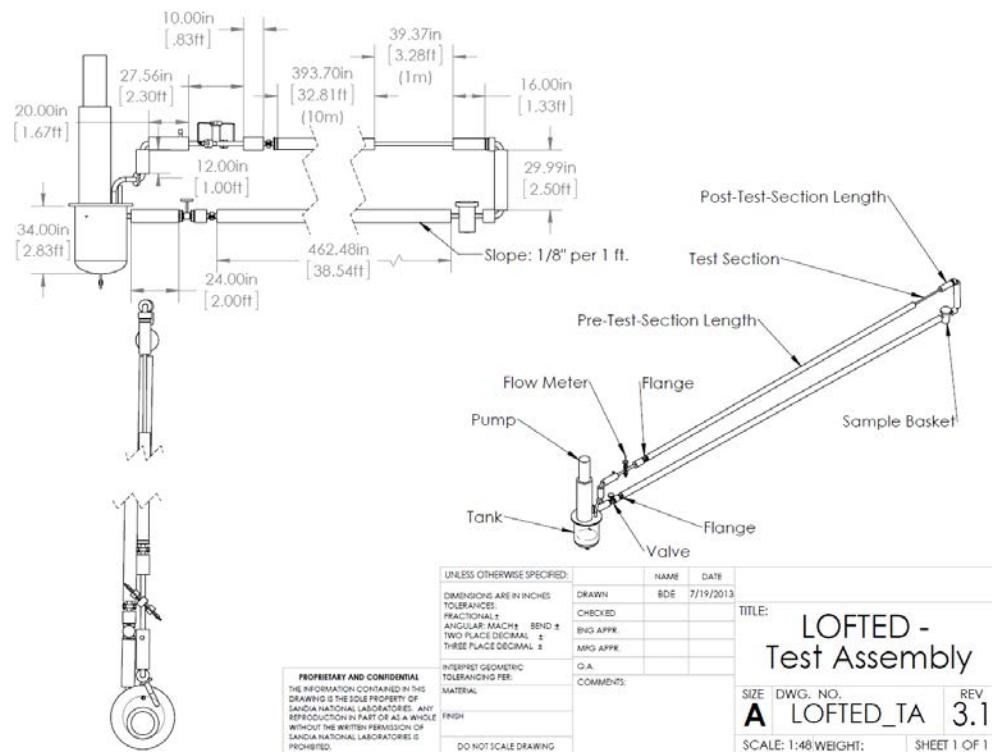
Conceptual Equipment Arrangement (not the final constructed piping layout)
